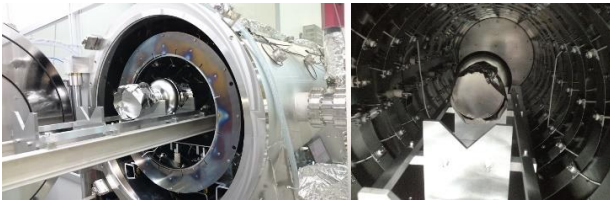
(left) Installing cavity using a lifter. (right) Cavity on a supporting tool inside the furnace.
